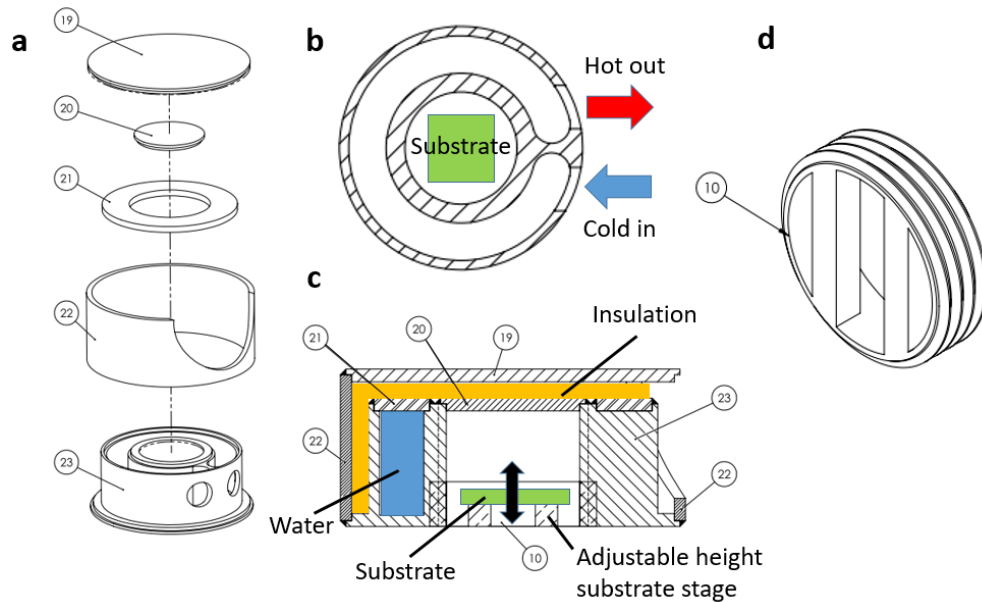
Detailed view of sample cooling chamber. Individual drawing items are numbered. (a) Assembly diagram of sample cooling chamber components. (b) Top view of drawing item 23, showing separated cold water inlet and hot water outlet. Chilled water circulates around substrate. (c) Side cutaway view of *sample cooling chamber*. Substrate sits on height-adjustable sample stage (item 10). Silica insulation fabric and water compartment are shown. (d) View of sample stage with external threads for height adjustment.
